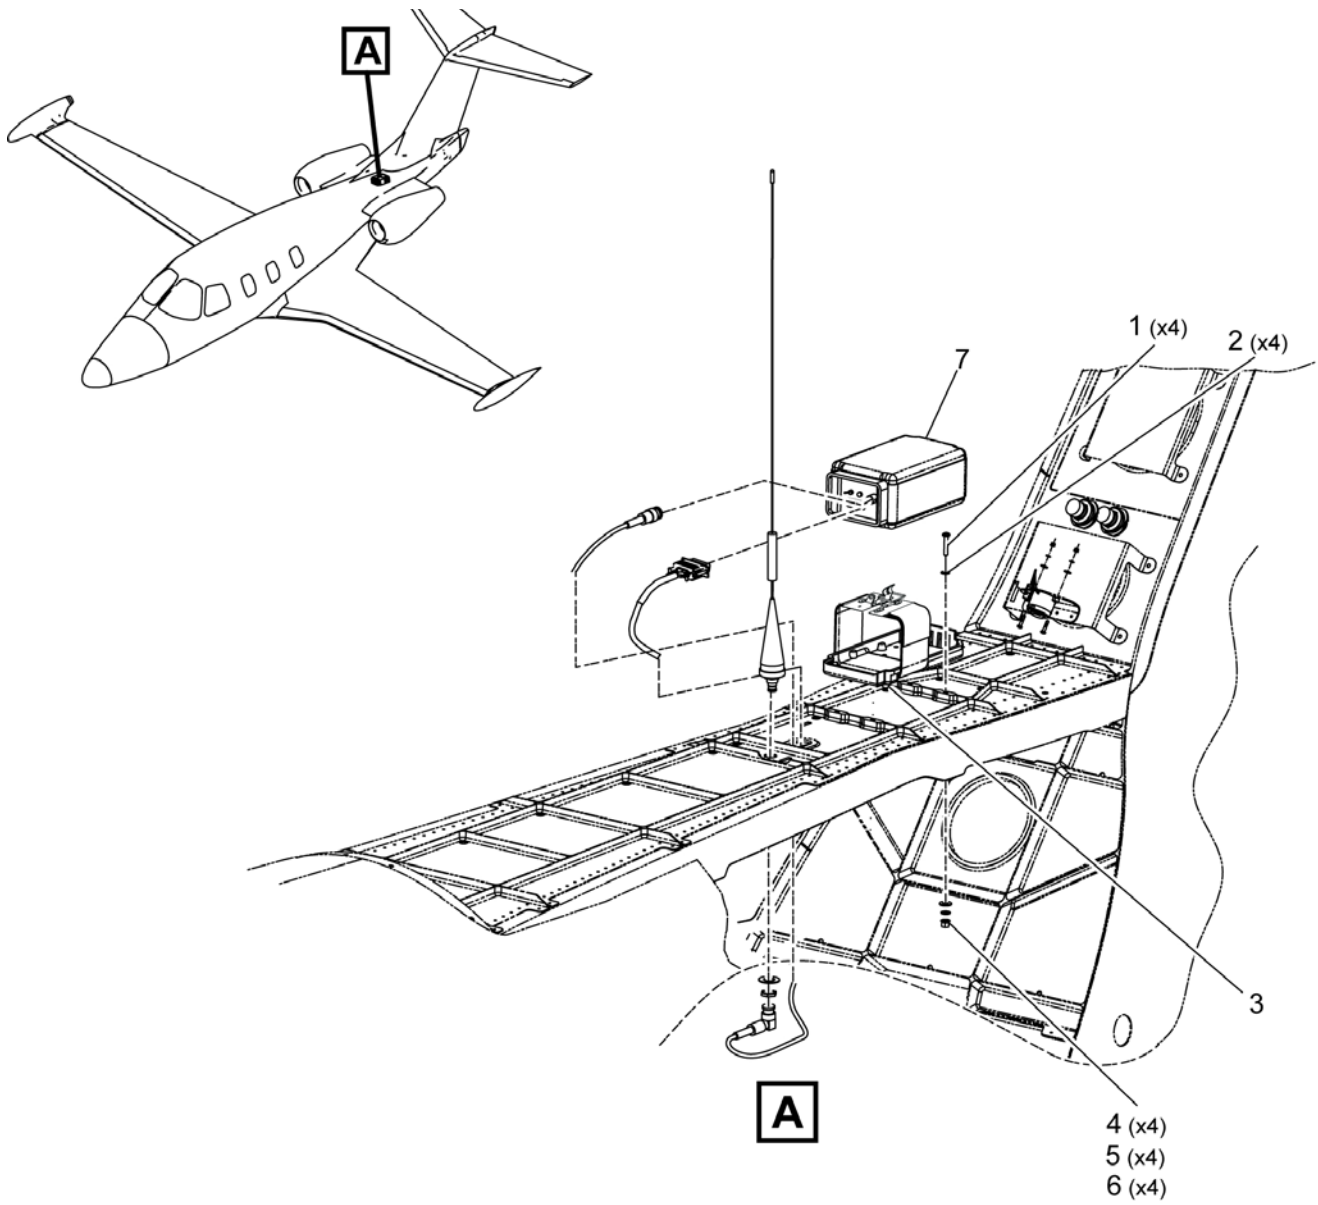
Emergency Locator Mounting Tray - Removal / Installation
